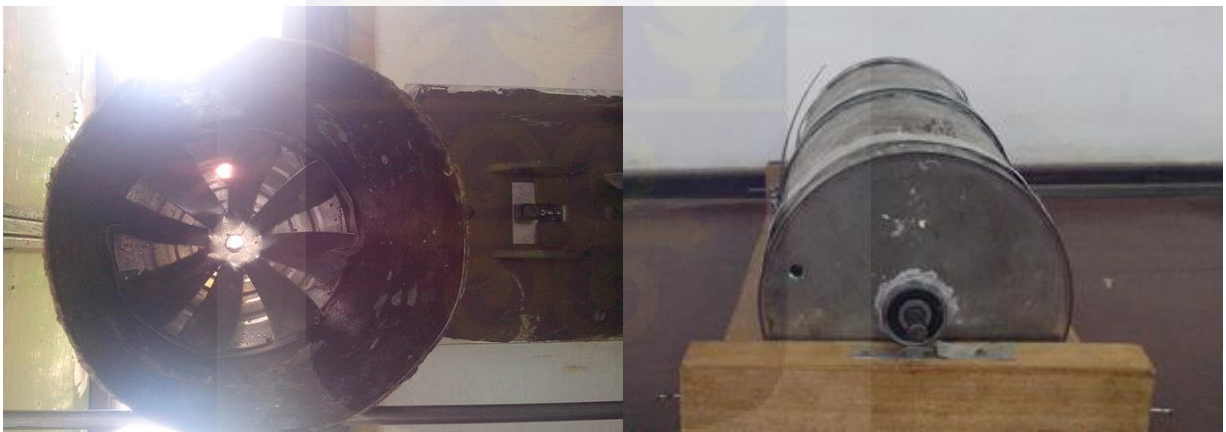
A picture showing a fixed stator in a casing and the attachment of a steel bearing.
